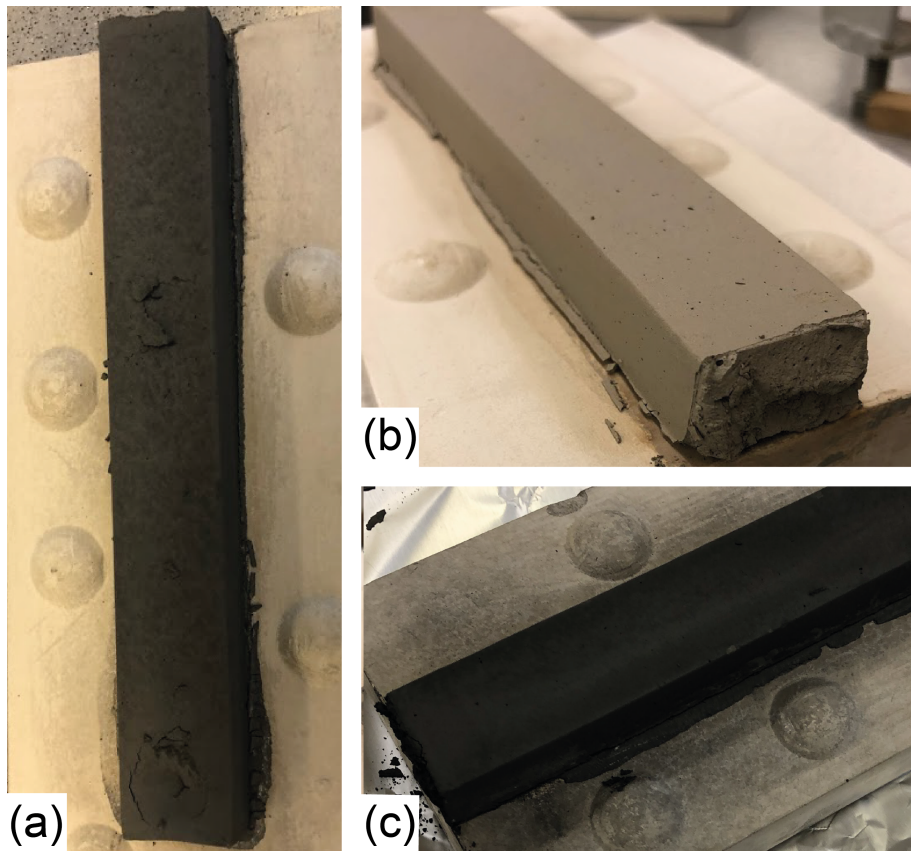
Examples of slip cast green bodies after demoulding. (a) is an example of cavitation and surface defects in a SiC-CB green body with 76 wt. % solid loading. (b) and (c) show more typical green bodies for SiC-Novolac and SiC-CB respectively. SiC-Novolac had a lighter colour due to the yellow of the Novolac powder.
